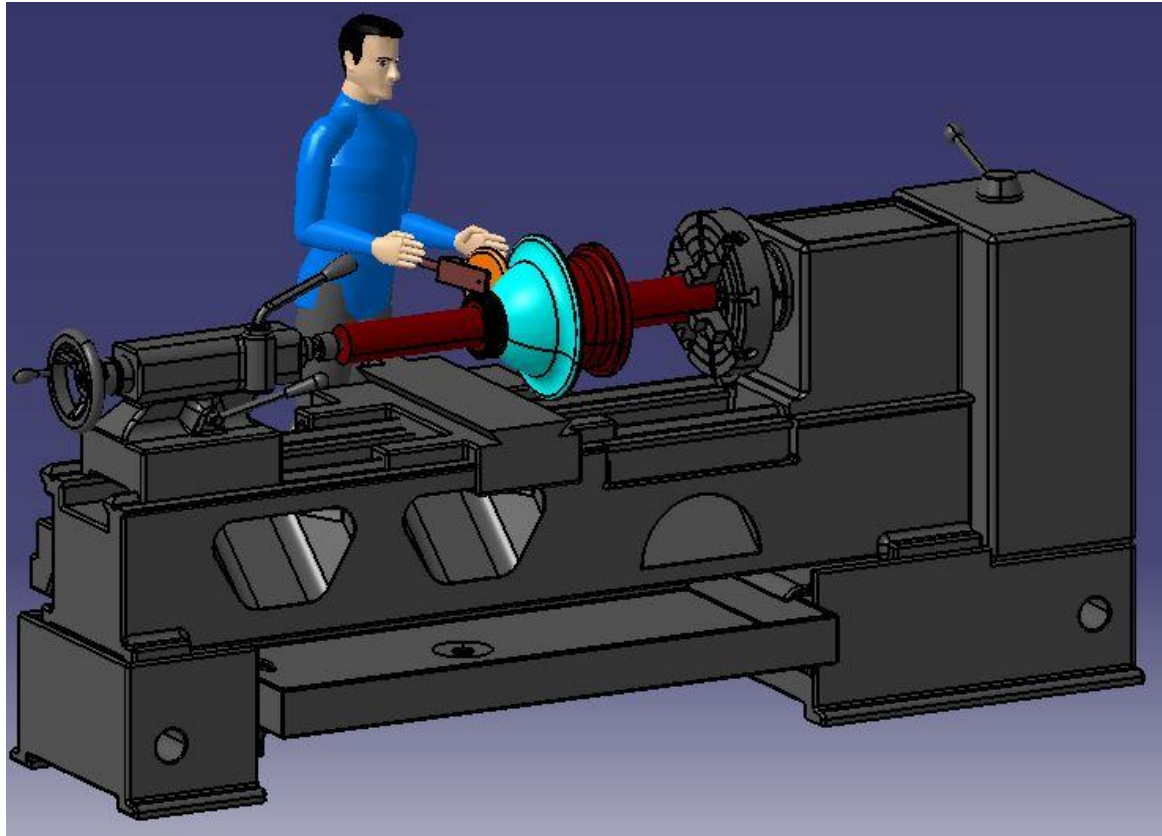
Metal Spinning Operation on Lathe Machine.
